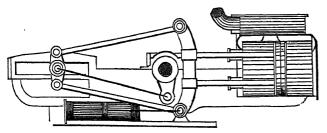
Double Piston-rod Screw-engine, Direct.
